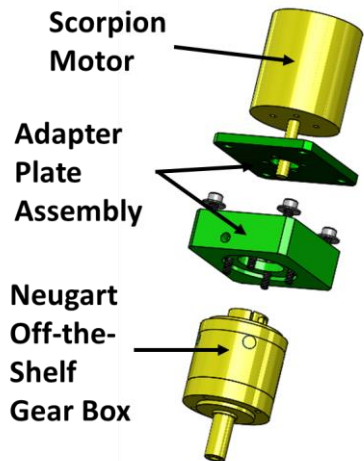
Motor, Off-the-Shelf gear box, and adapter plate assembly shown in an exploded view
